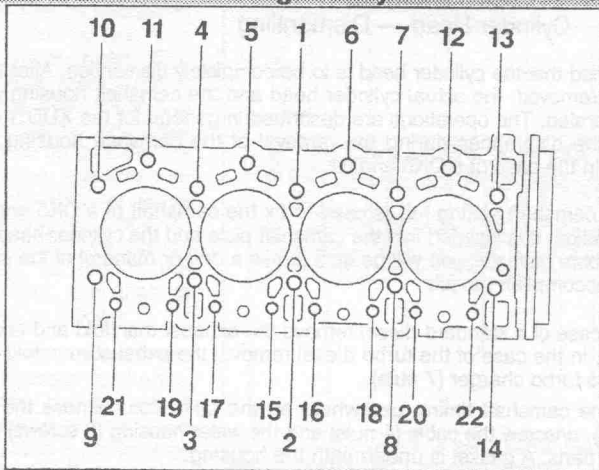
Tightening sequence — Cylinder head bolts.
